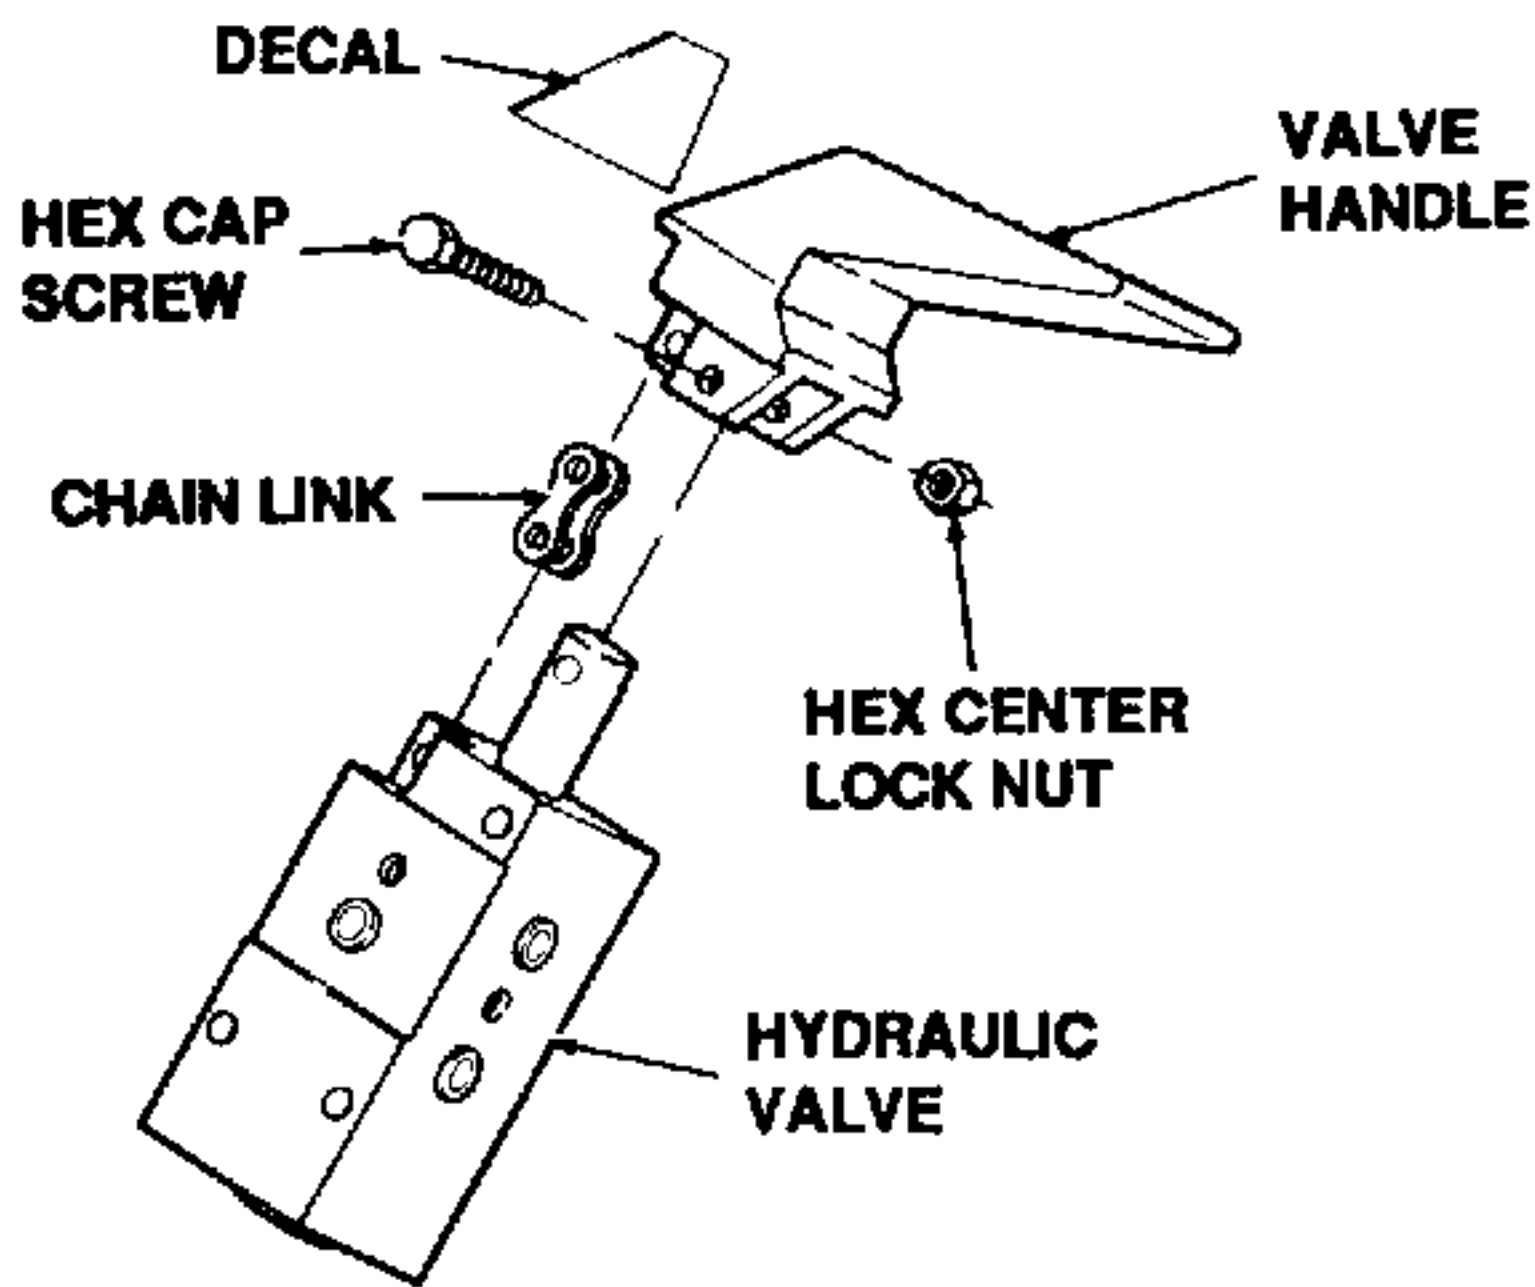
Positioning Valve Handle on Hydraulic Valve.
